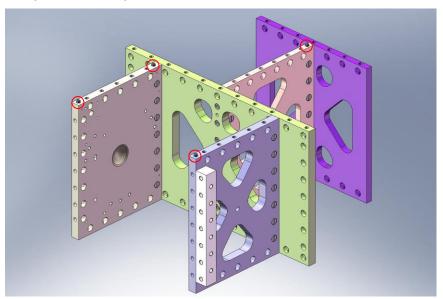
Dowel pins pressed into bottom of Pitchfork Assembly. After this step, the Pitchforks are ready for installation in Stage 1.
